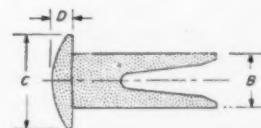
Bifurcated rivet. Nominal dimensions are given in Table 3.
